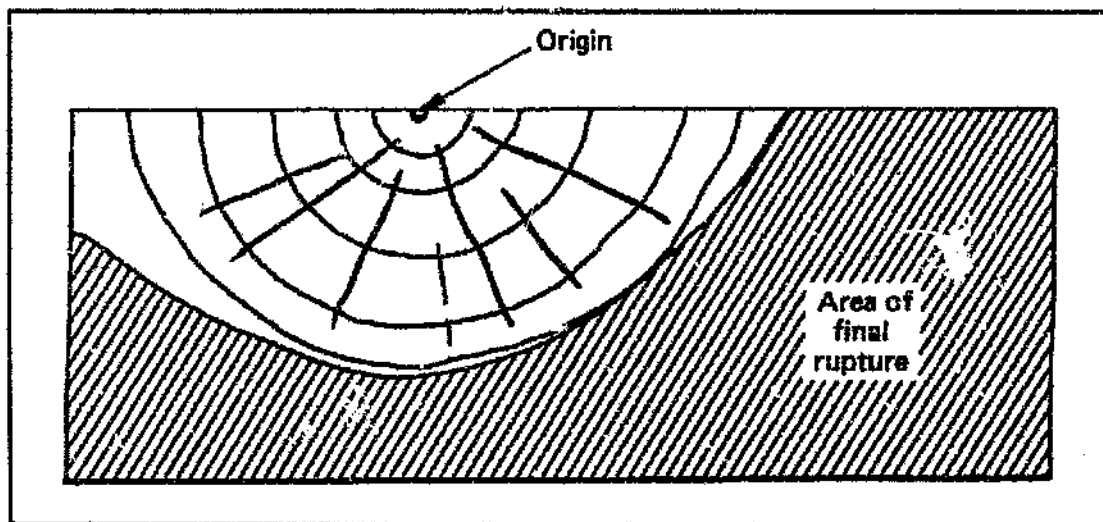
Diagrammatic representation of a typical fatigue fracture surface⁽⁴⁾.
